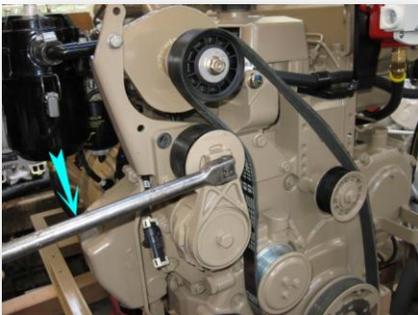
Turn the spring-loaded belt tensioner counter-clockwise to remove and install the belt.
